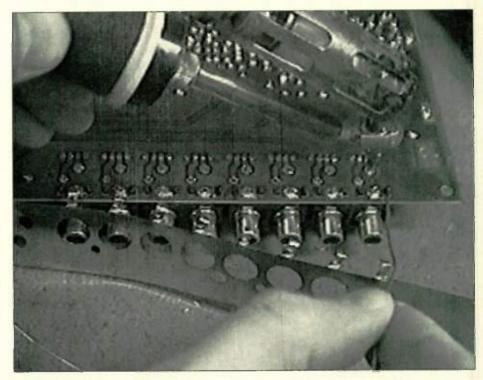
Using the Weller DS-700M to remove solder from the RCA connectors of the TASCAM DA-88 A-to-D card.
